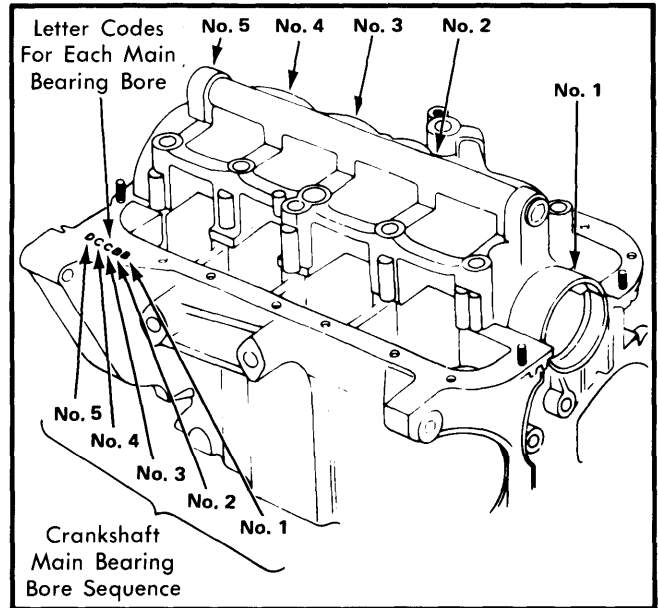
Crankshaft Identification Locations (1335 cc Engine)
